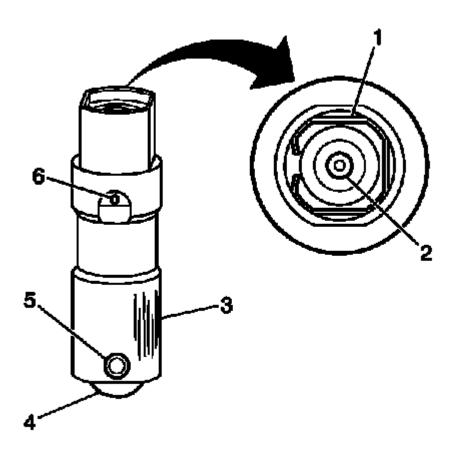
Identifying Valve Lifter Inspection Areas Courtesy of GENERAL MOTORS CORP.
